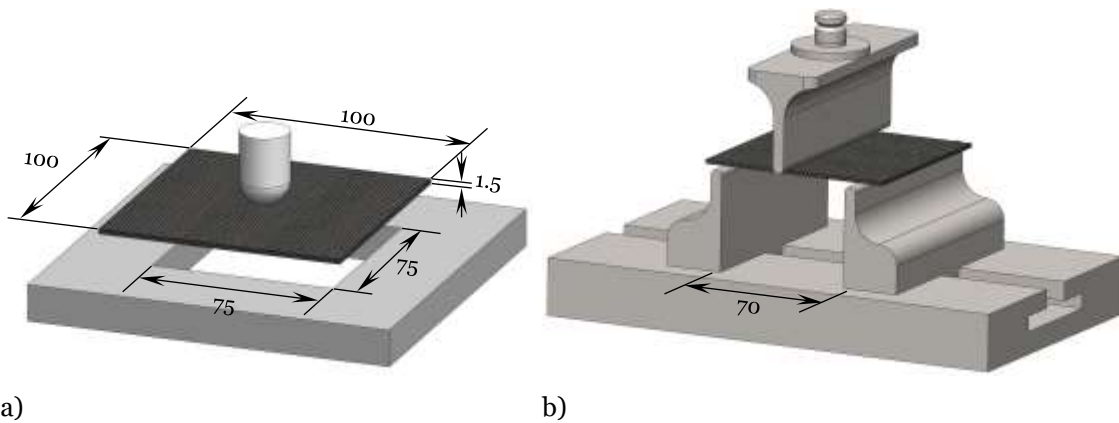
a) Schematic specimen geometry and dimensions (mm) of LVI apparatus test; b) Three point bending test apparatus.
